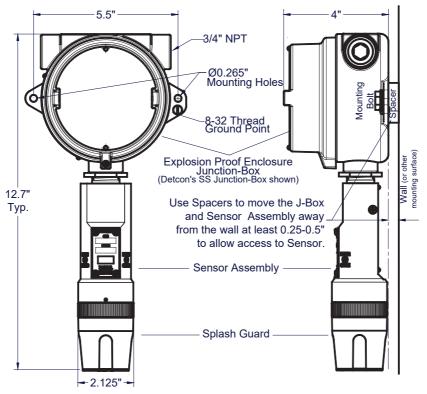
Outline and Mounting Dimensions (Stainless Steel Junction Box)
